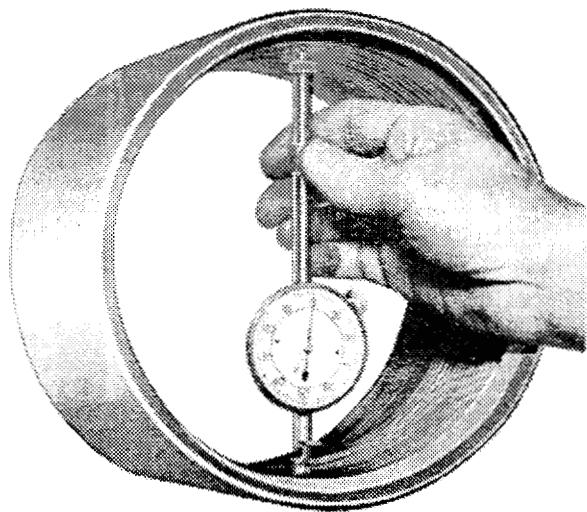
Typical Internal-Thread Taper Gauge for Threads in Sizes 4 $\frac{1}{2}$ and Larger
